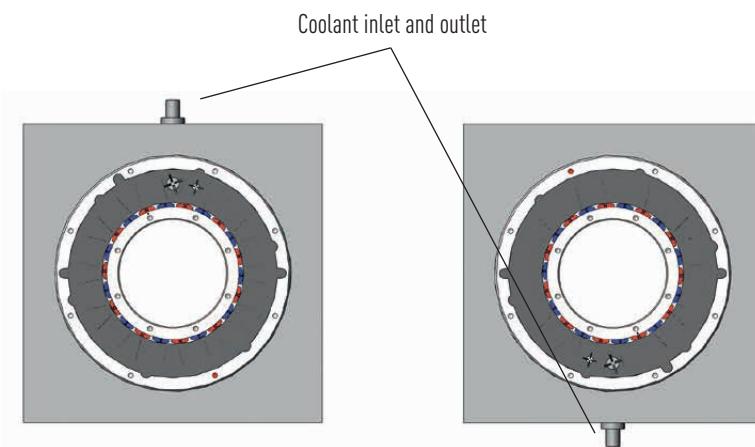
Coolant inlet and outlet in vertical mounting position
